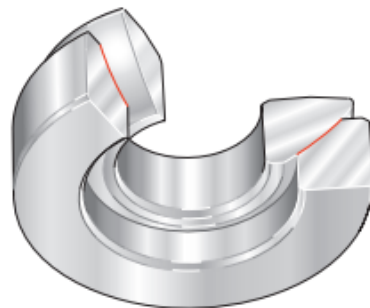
GE-12-AW Axial Spherical Plain Bearing [19]
